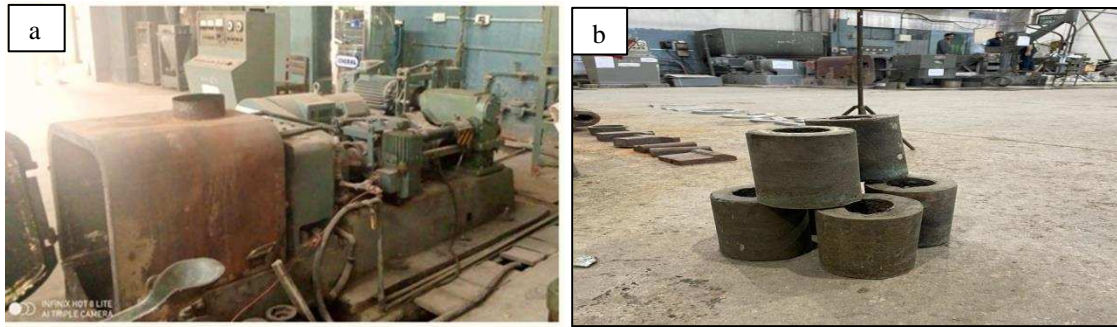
and b) Horizontal centrifugal casting machine and developed sleeves blanks
